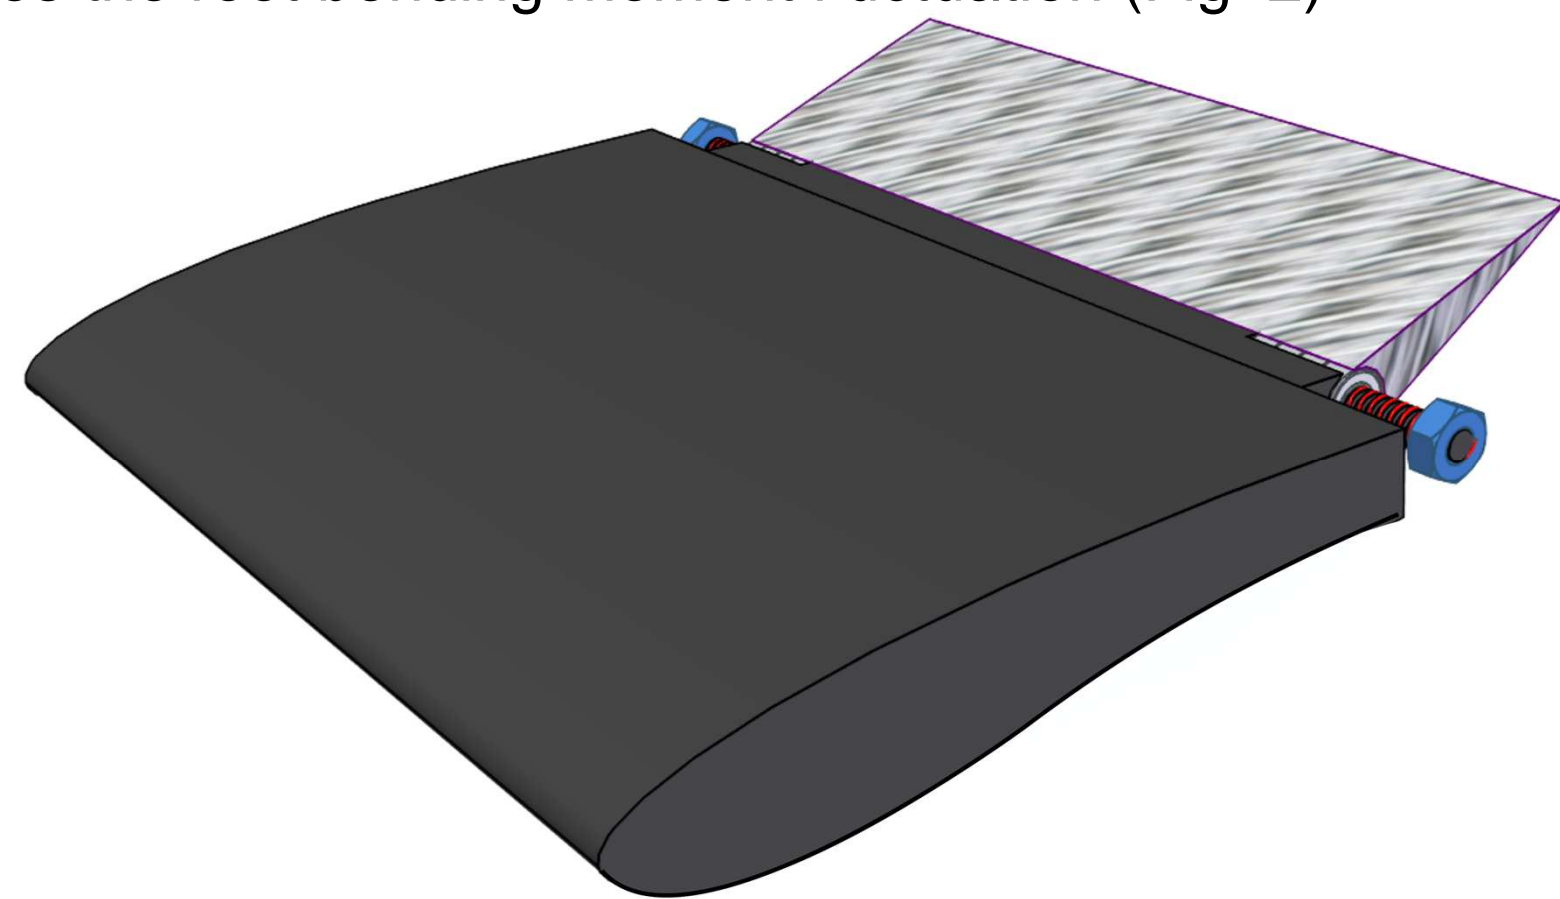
CAD drawing of the morphing blade tested in a water channel.
